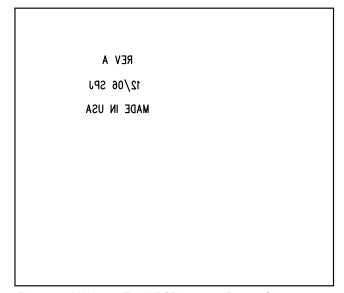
MAX2023 EV Kit PCB Layout—Bottom Silkscreen
